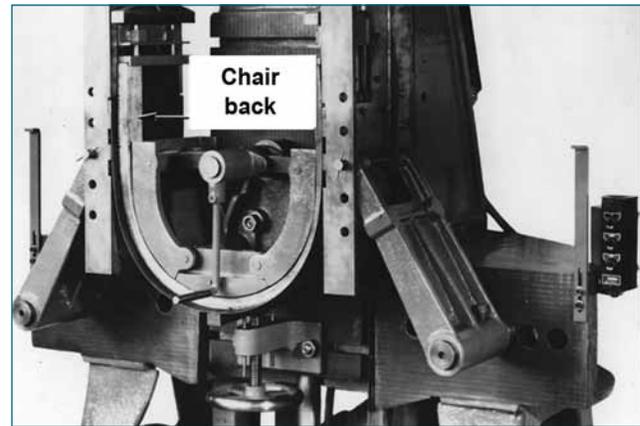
Chair back being bent through an arc of 180° in a bending machine.
